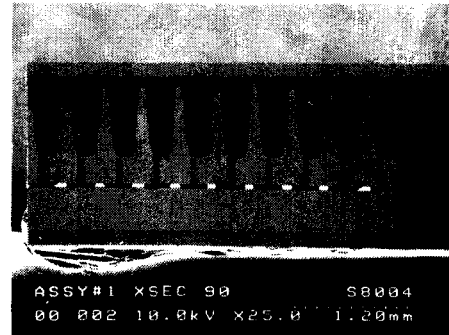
Array-Cr/Au substrate assemblies were cross-sectioned to evaluate the solder joints.
